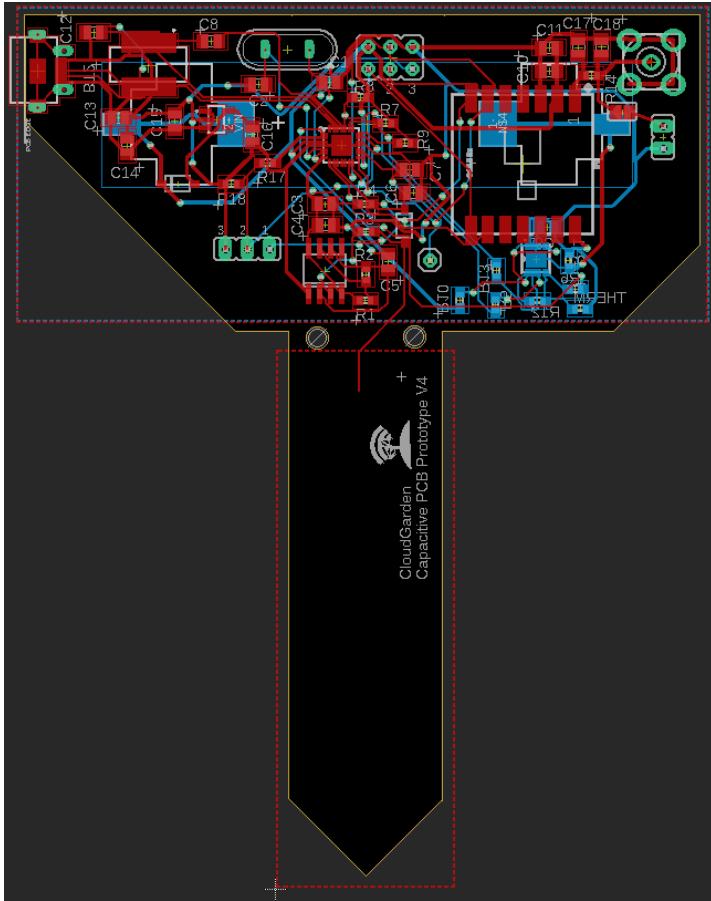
1st Soil Moisture Sensor PCB Prototype
